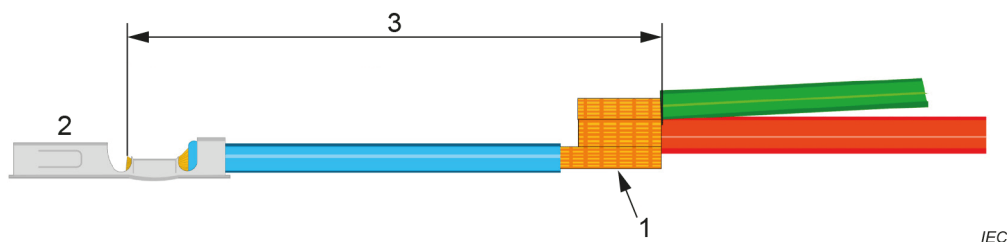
Illustration of the conductor length (3) between terminal (2) and welded package (1)
